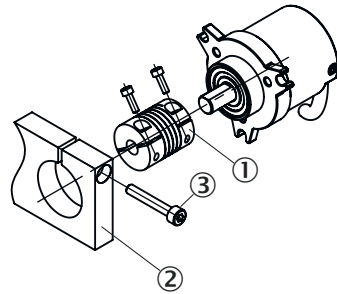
Installing the face mount flange 3xM3 via the clamping attachment
